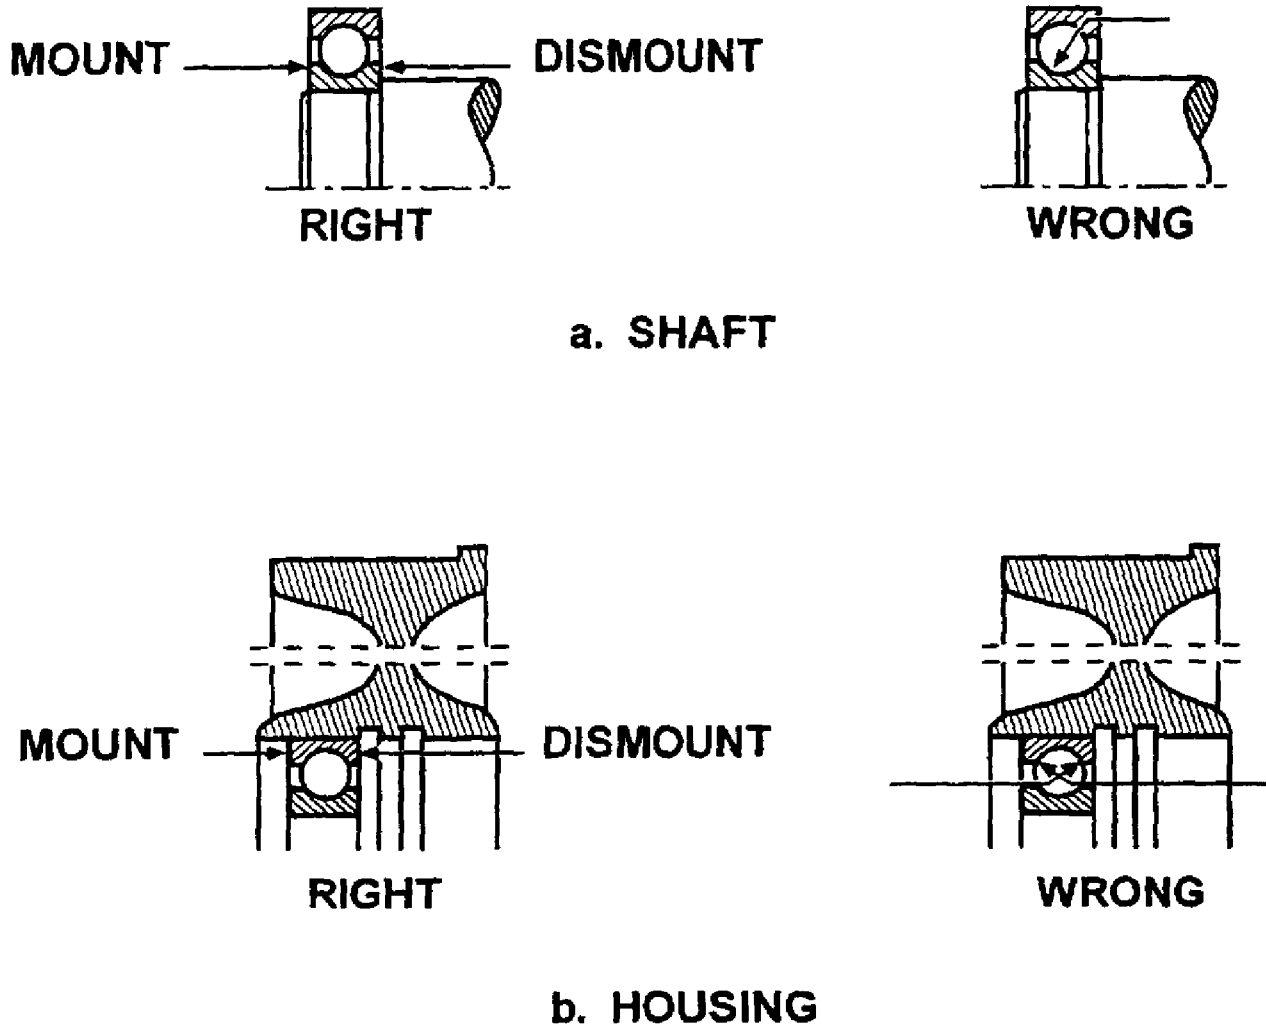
Application of Mounting and Dismounting Forces to Tightly Fitted Bearing Rings
